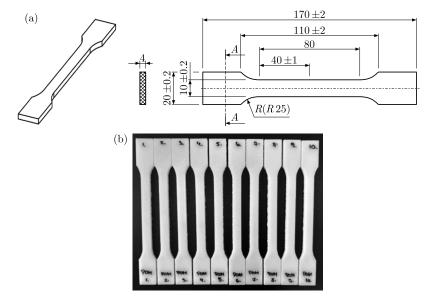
(a) Specimen dimensions (in mm); (b) specimens made of POM before testing.
